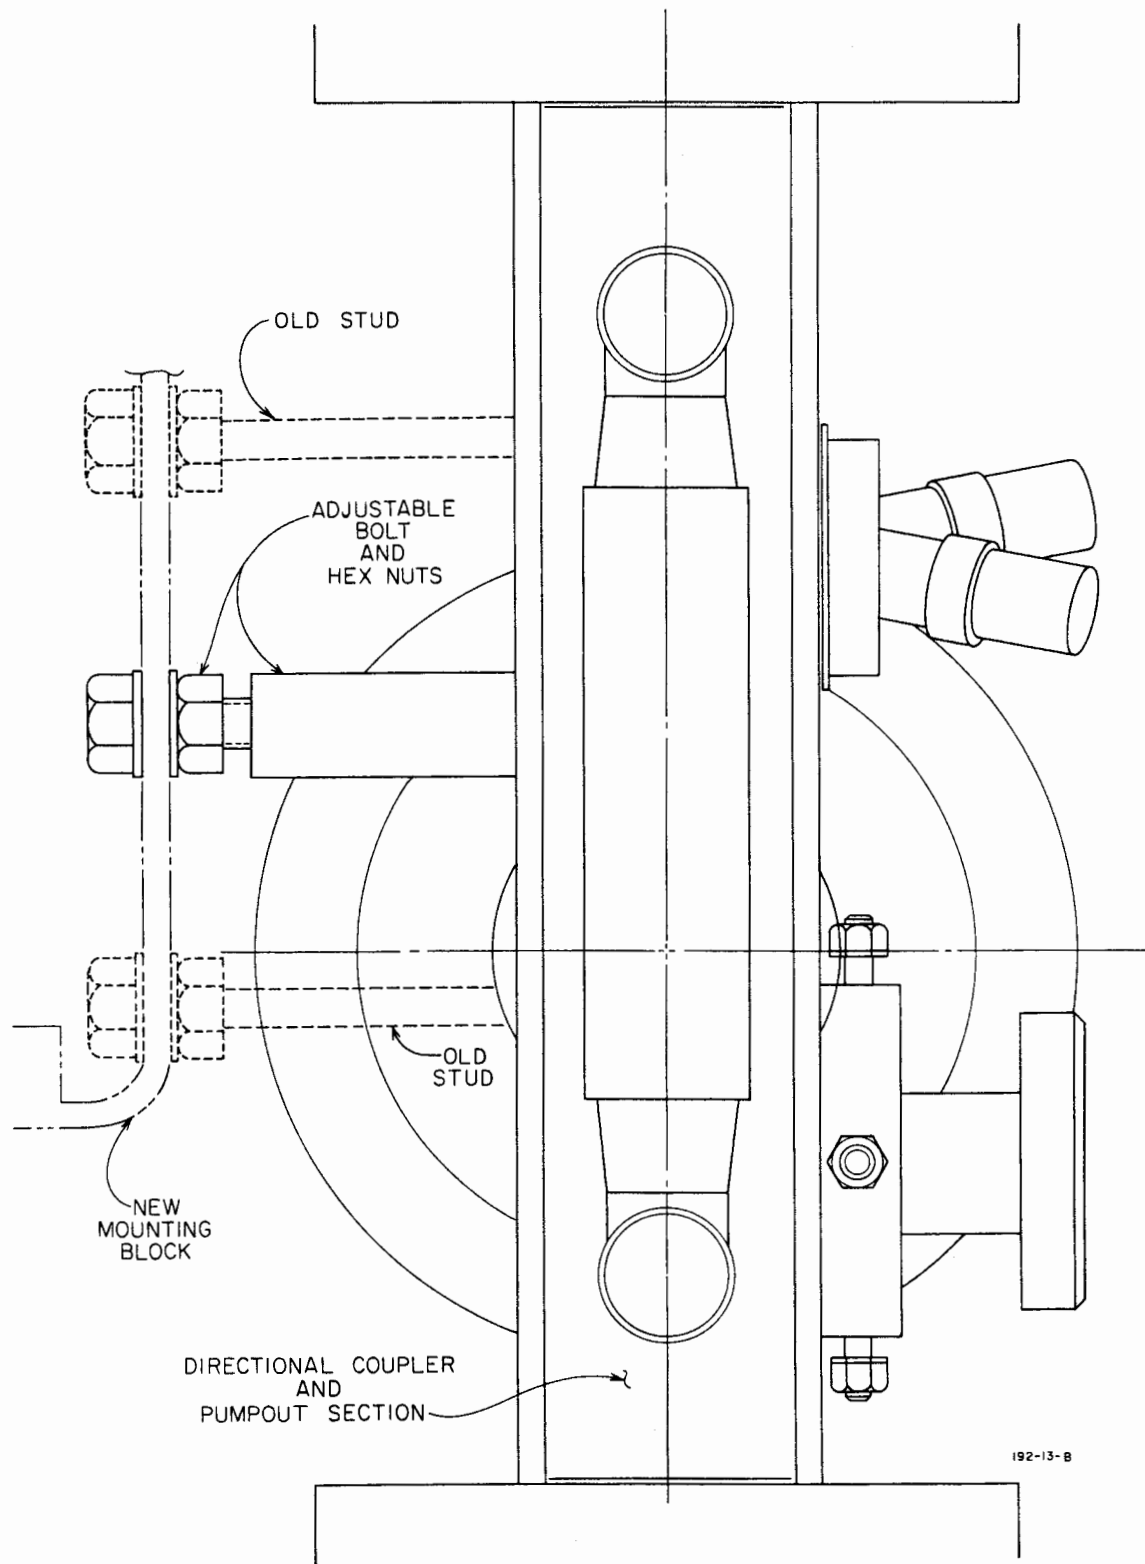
MODIFIED MODEL A DIRECTIONAL COUPLER MOUNTING
